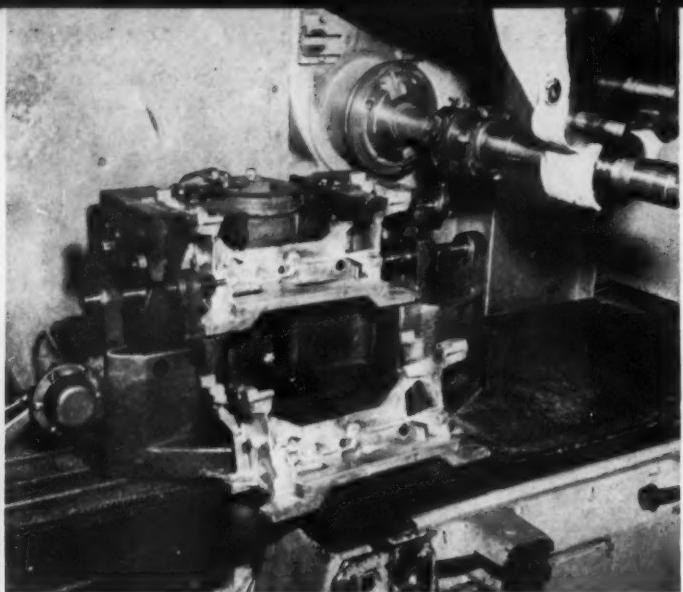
Setup for straddle-milling electric typewriter power frame. Special air operated fixture holds casting securely without distortion. A simpler fixture might have distorted the thin-walled casting.
